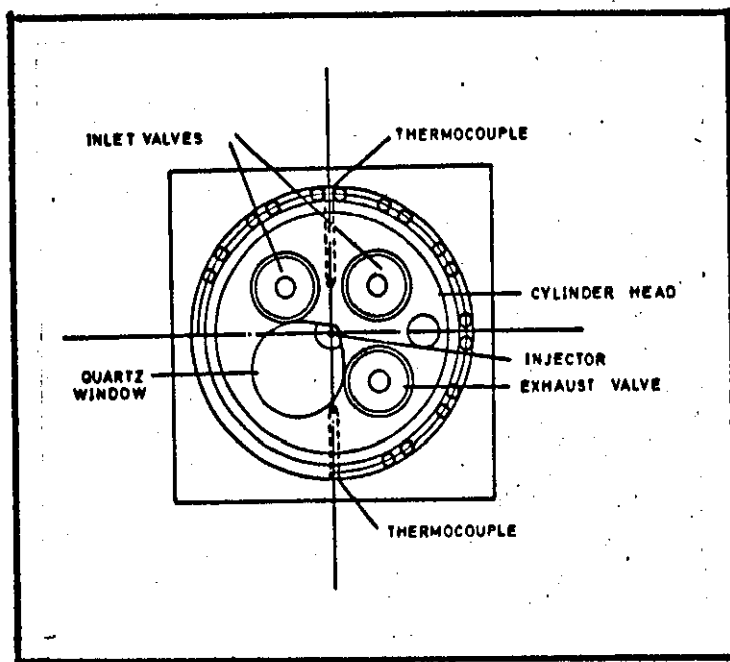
Sketch of large engine. cylinder head and position of thermocouples.
